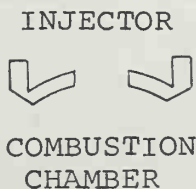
Install heat shield so concave side is towards combustion chamber.
